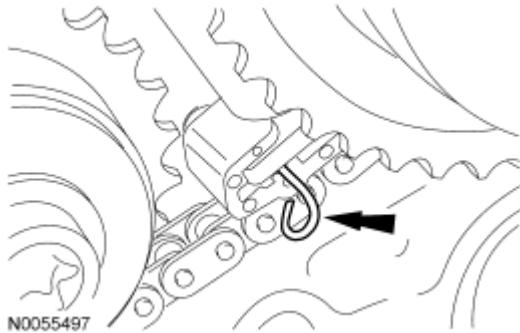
Identifying Lock Pin On RH Secondary Timing Chain Tensioner
